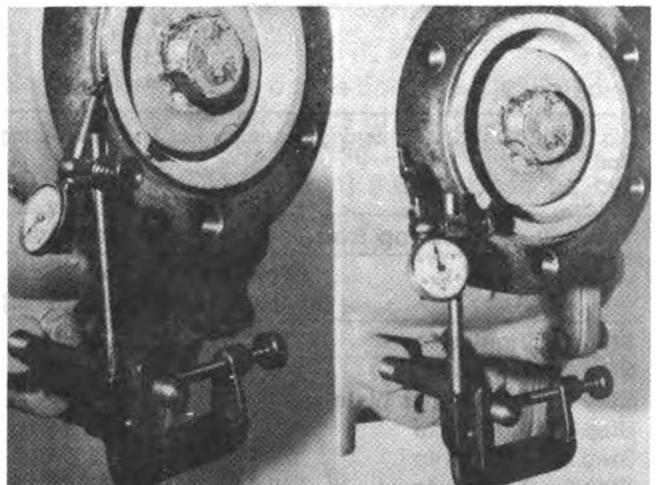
(N114156). Check The Movement Of The Mounting Flange.
